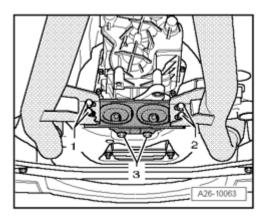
Removing/Installing Mounting Bolts For Front Exhaust Pipes Courtesy of VOLKSWAGEN UNITED STATES, INC.
